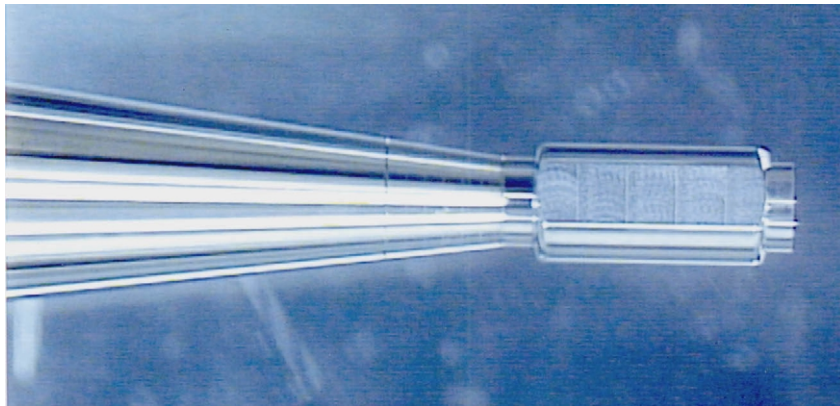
An aluminum mandrel that will be used to form a cocktail hohlraum. A flat runs the length of the hohlraum. The small diameter regions at each end of the mandrel will become the laser entrance holes.
